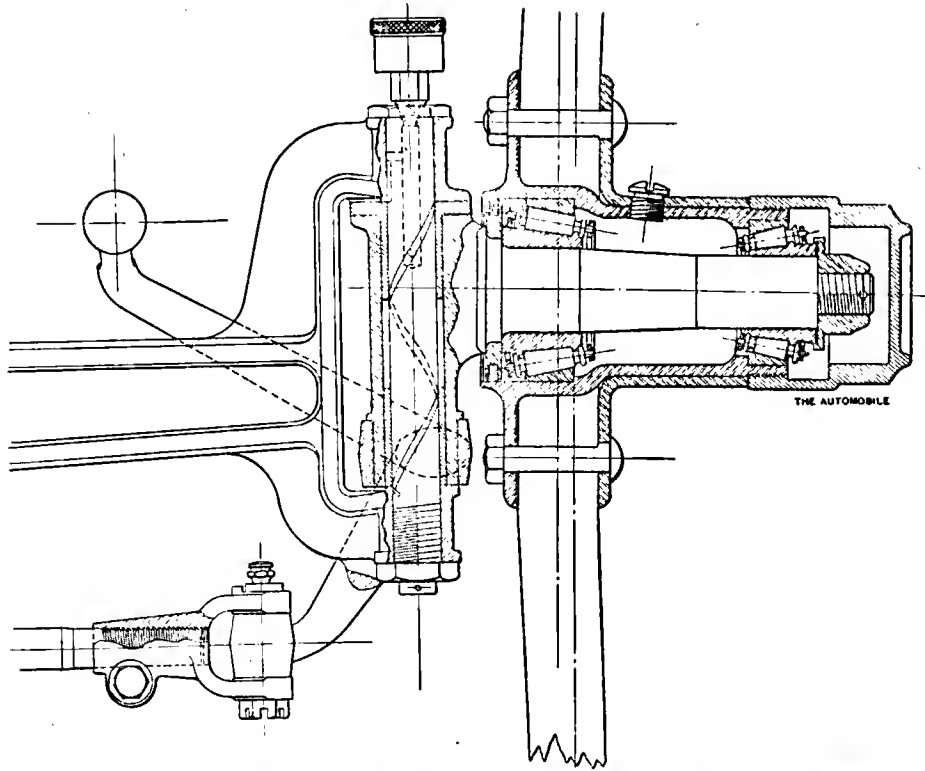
ROLLER-BEARING FRONT WHEEL AND STEERING KNUCKLE, PARTLY IN SECTION.
